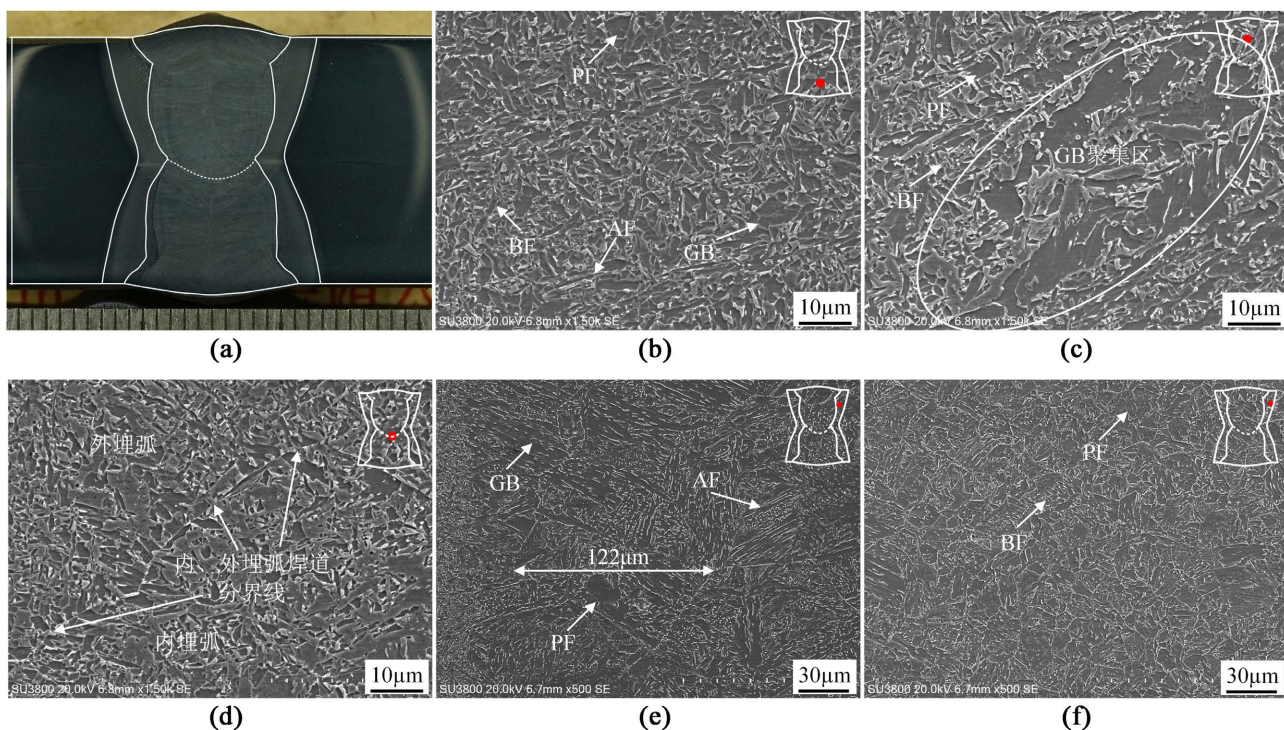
Macroscopic metallography and microscopic structure. (a) Macroscopic metallography; (b) Typical structure morphology of weld zone 1; (c) Typical structure morphology of weld zone 2; (d) External submerged arc welding seam structure; (e) Coarse grained zone structure; (f) Fine grained zone structure
